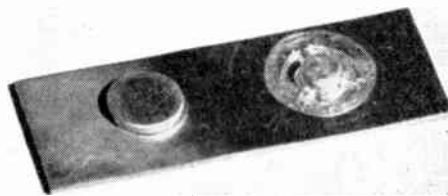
Contact point of silver welded on a copper strip.
